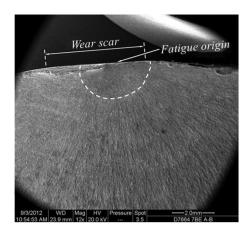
SEM photograph of the fracture surface after ultrasonic cleaning.
